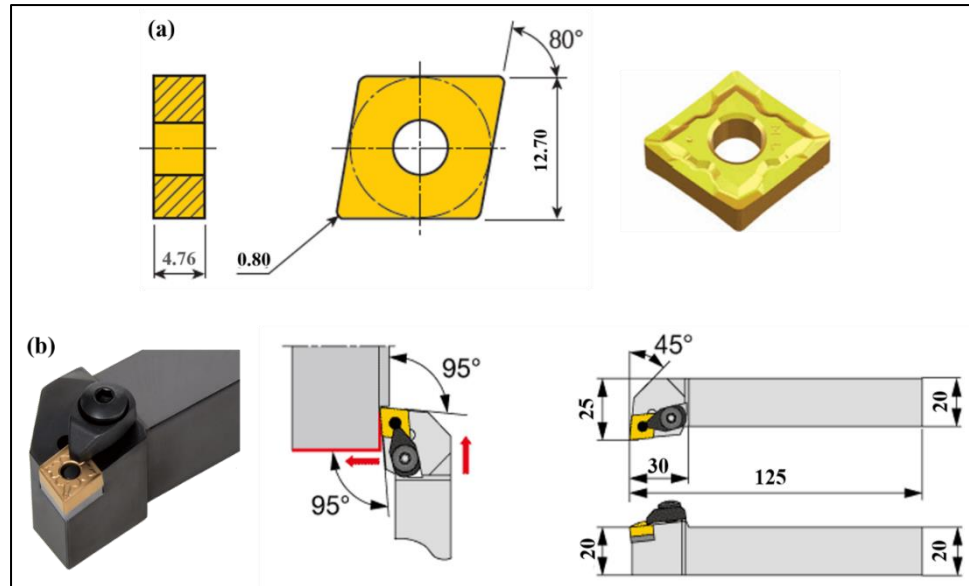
Geometry of (a) cutting tool insert (b) Tool holder
